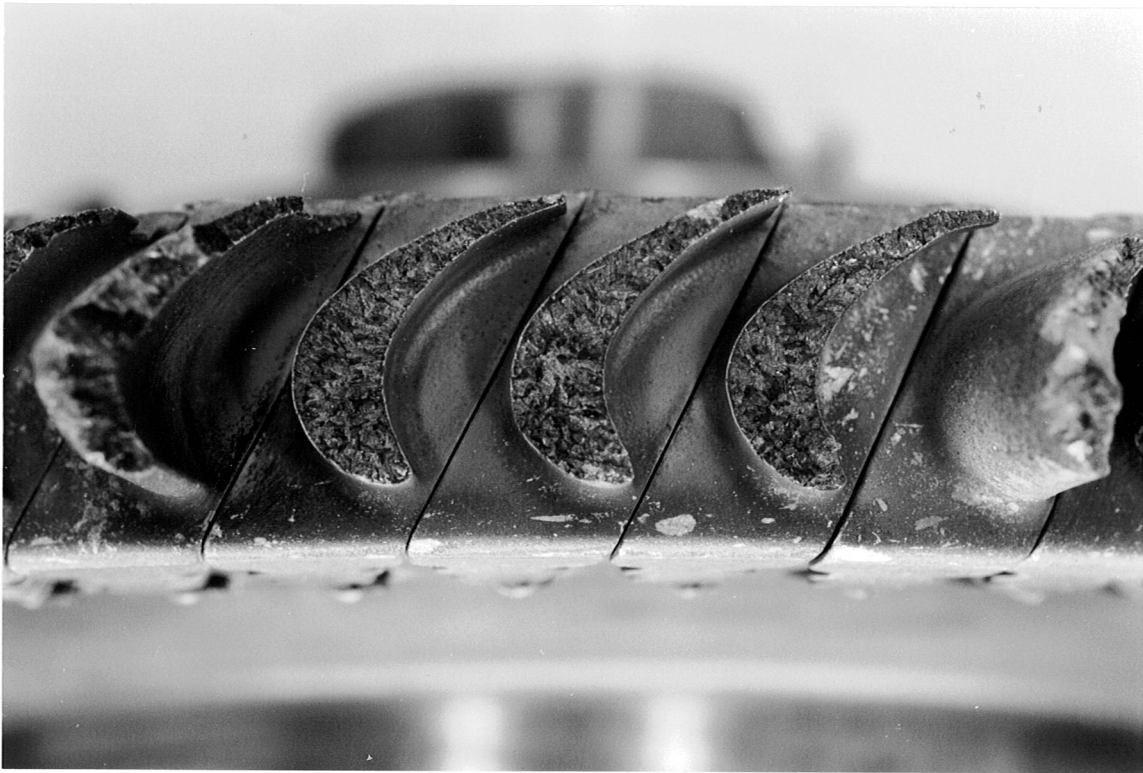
Fracture surfaces of a section of the wheel showing fractures in the blades just above the blade platform. Fracture surfaces are of uniform appearance with no evidence of precracking.
